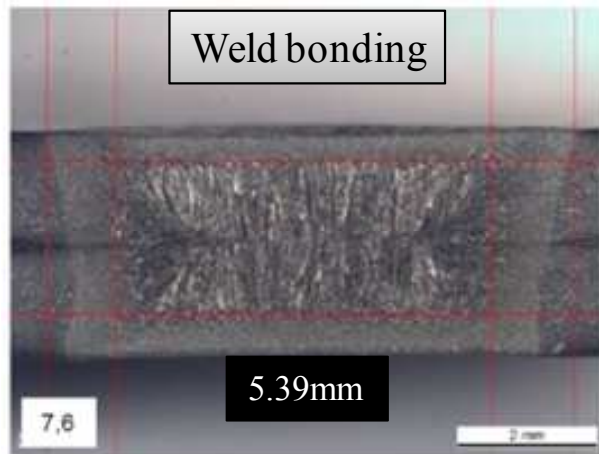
Metallographic of spot weld in hybrid joint
